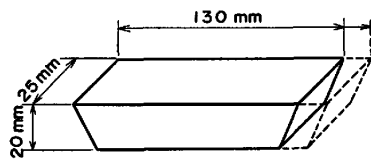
Shape and dimension of sample for measurement of rate of expansion.
